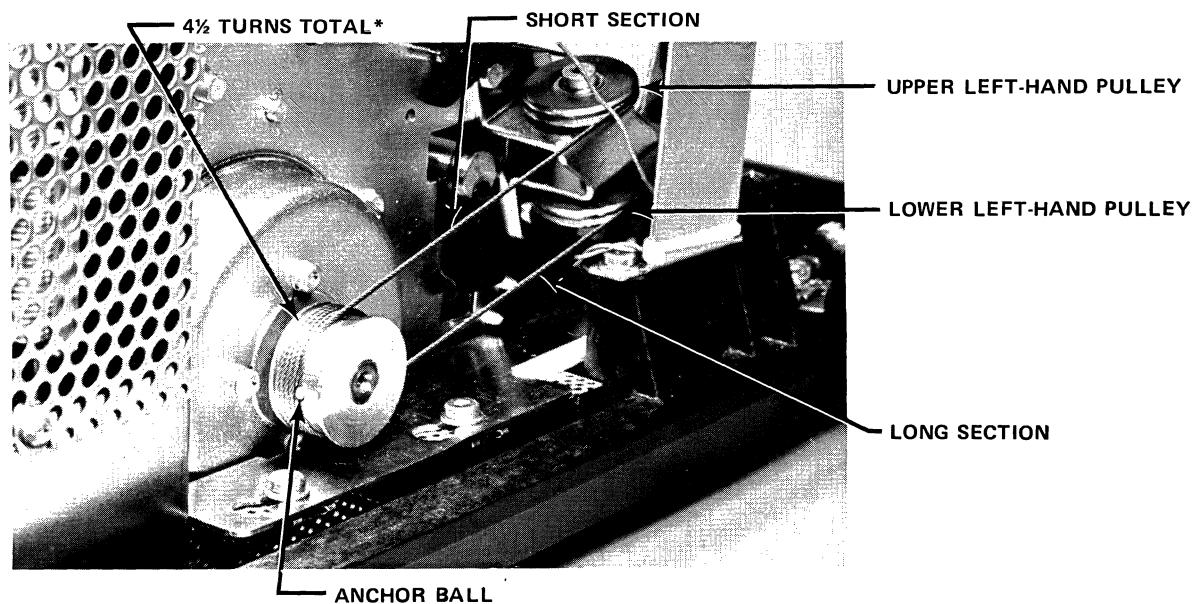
STRINGING THE DRIVE CABLE - LONG SECTION
